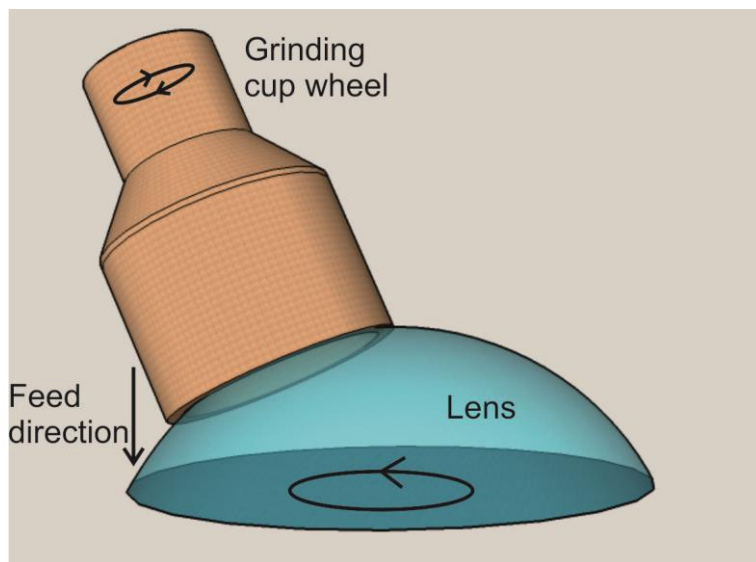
Schematic of grinding a convex lens with a diamond cup wheel tool.
